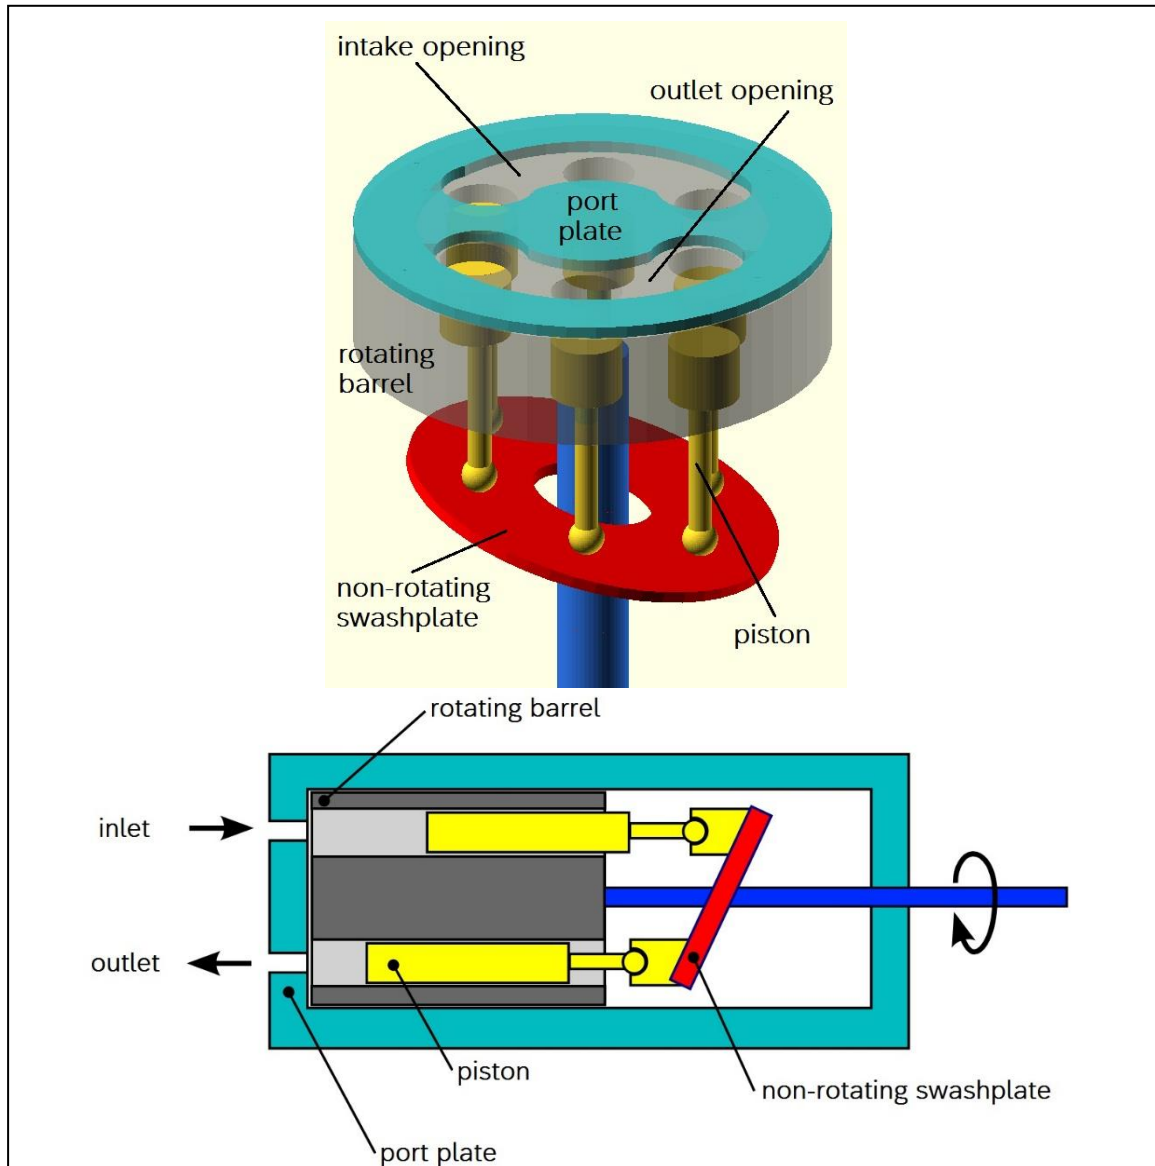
Axial piston pump (swash plate pump design)¹⁸
